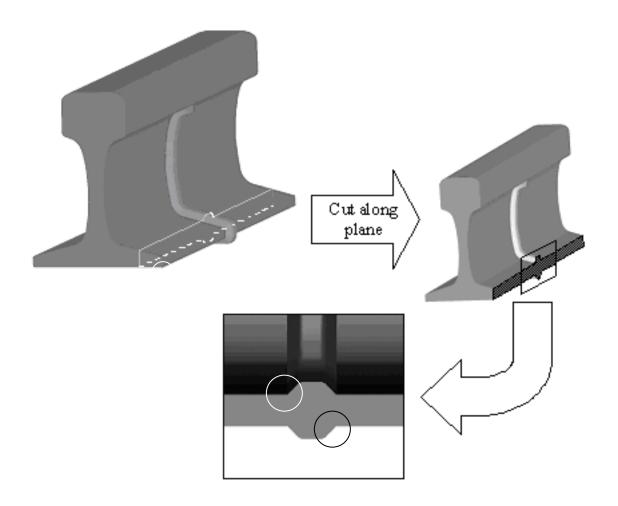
The thermite rail-weld weld-toe. Section of a thermite weld in the rail base. The circled regions are at weld-toes.
